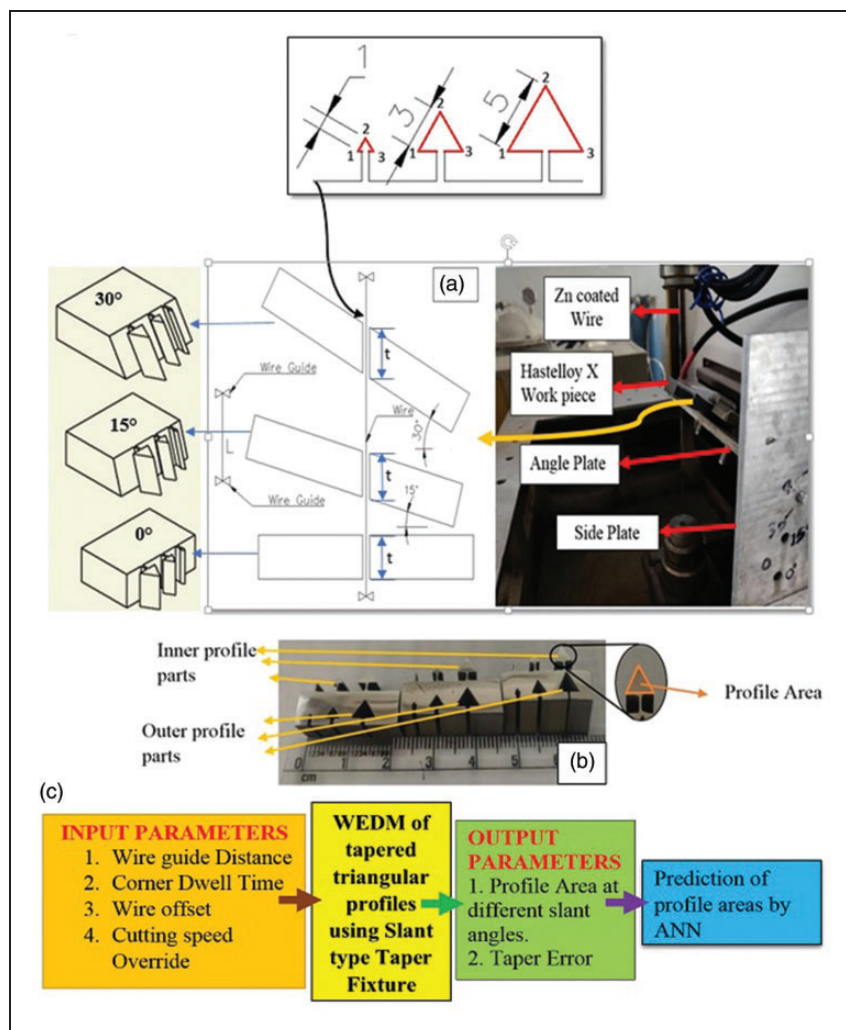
(a) Slant type taper machining and fixture. (b) Taper triangular profiles. (c) Experimental outline.
